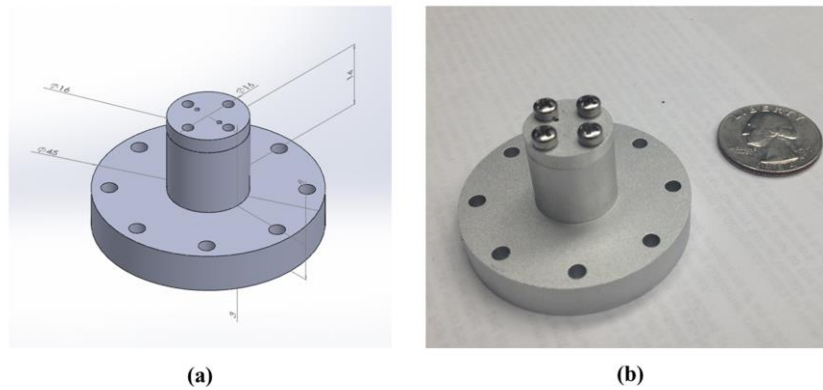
(a) Computer aided design (CAD) model of the pump housing and end cap and (b) finished assembly of the housing and end cap
